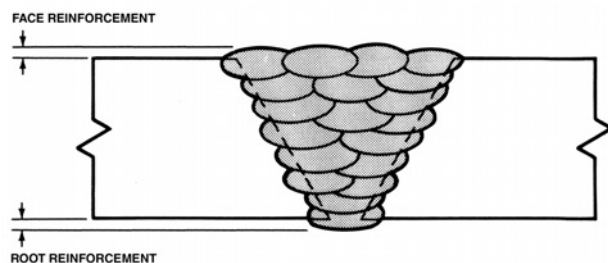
V-Groove butt joint multi-pass weld with complete joint penetration with face and root reinforcement shown.
